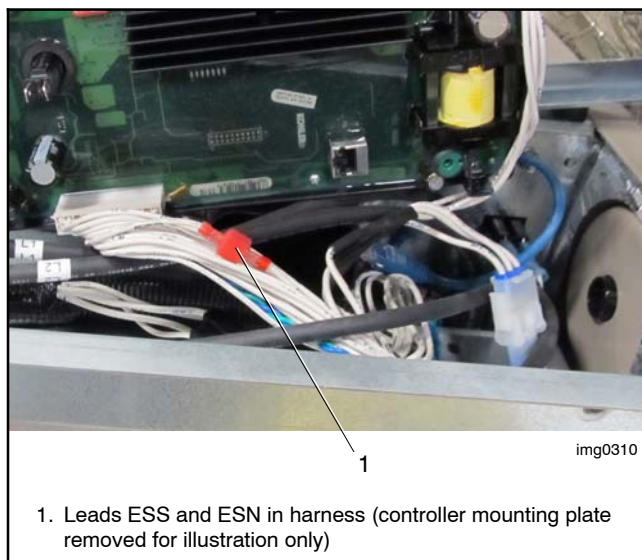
E-Stop Harness Assembly GM90094 (factory-assembled)
